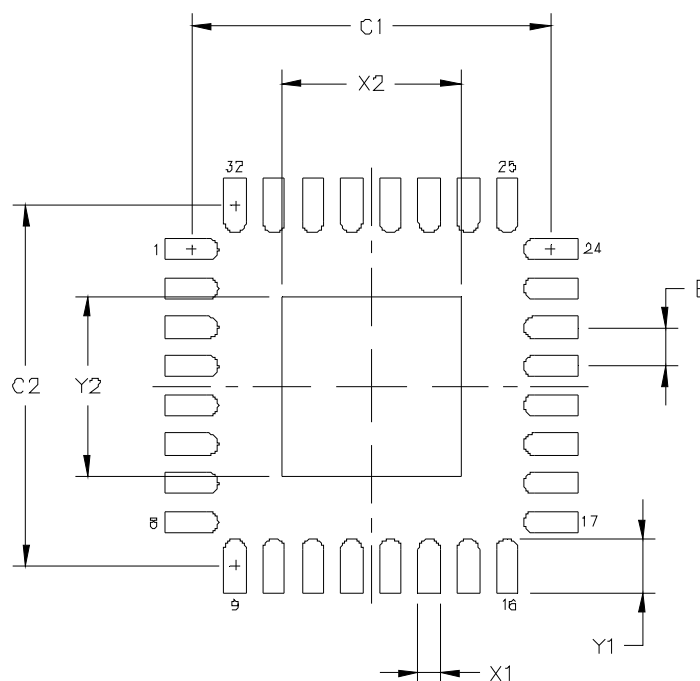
Si53311 5x5 mm 32-QFN Package Land Pattern
